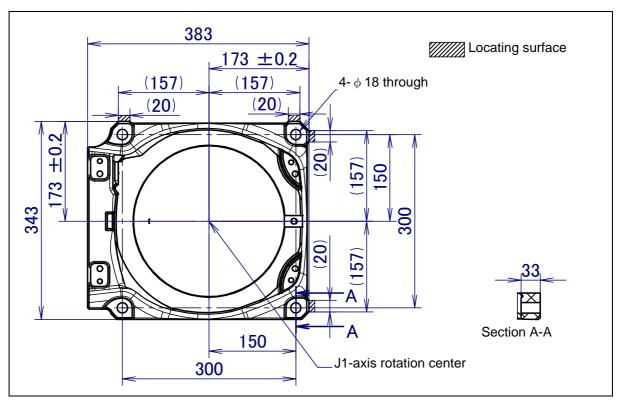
(a) Dimensions of the robot base (back side connector plate)
